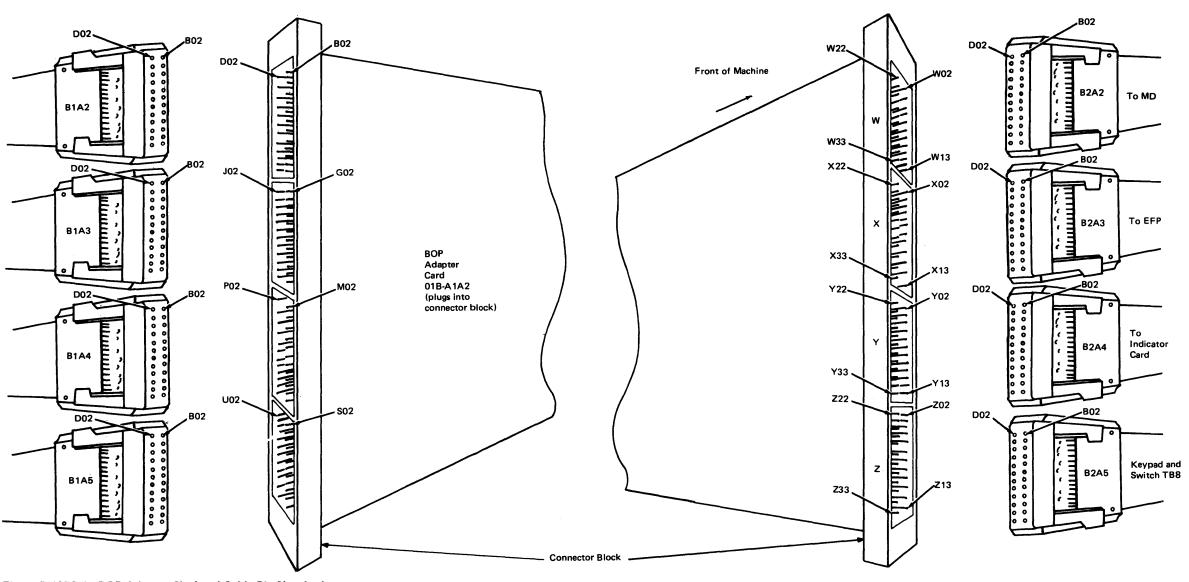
BOP Adapter Card and Cable Pin Numbering
